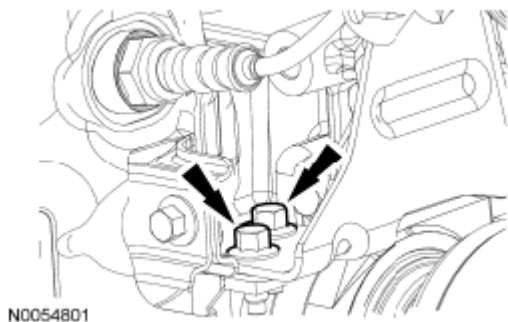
Locating RH Catalytic Converter Bracket Bolts
